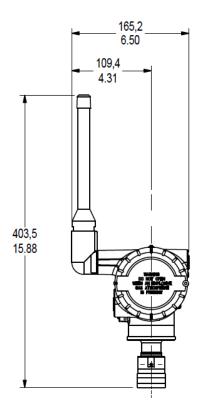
In-Line Gauge, typical mounting dimensions for STGW84L, STGW87L (4 dBi antenna shown)
